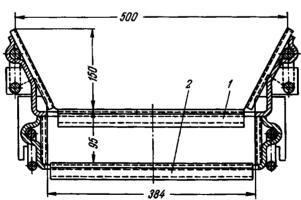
Intermediate section of CKP-11 (SKR-11) conveyor
